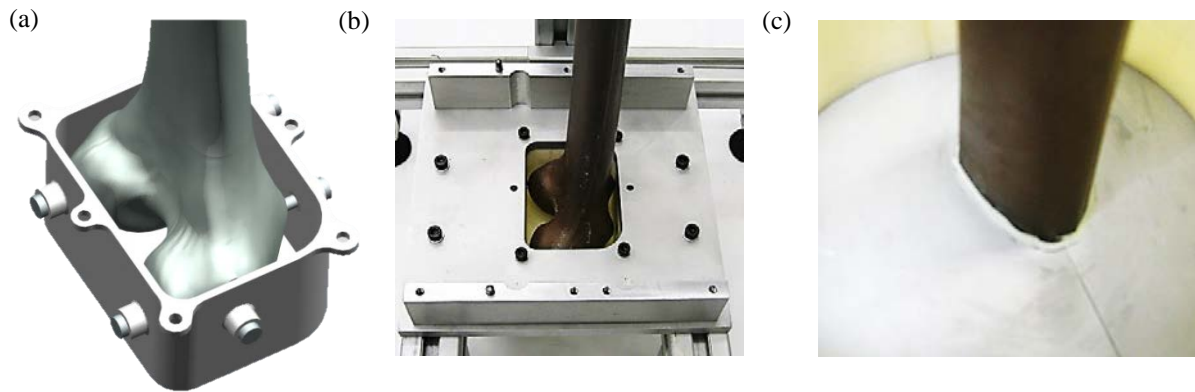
Mould assembly components: (a) CAD image of distal femur attachment; (b) attachments between femur and intermediate base plates (c) cavity base plate femur seal.
